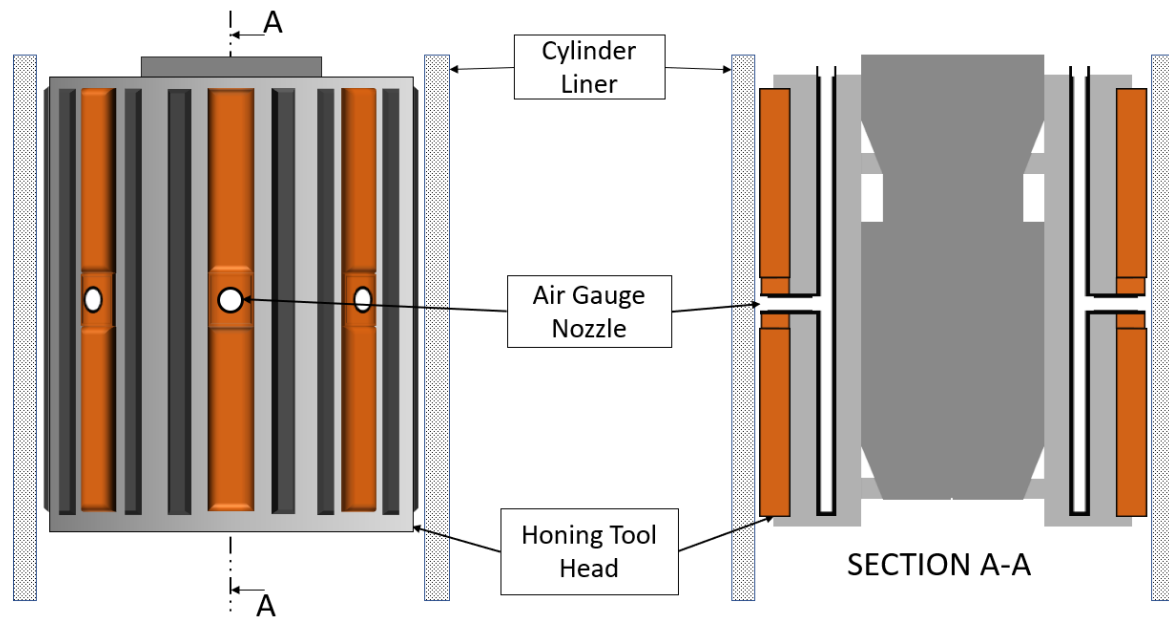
A schematic showing the honing tool head inside a cylinder liner during the honing process. Cylinder is already fitted inside the engine block at this stage (engine block not shown). RHS is a cross-section of the LHS about line A-A. Only the cylinder liner cross section is shown in the LHS figure.
